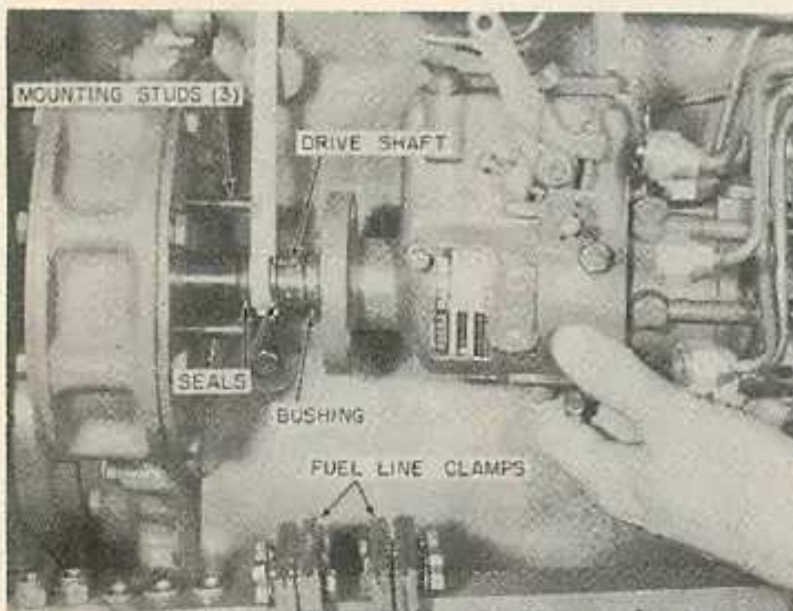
Remove fuel line clamps and spread fuel lines as shown to remove pump. Use Roosa-Master seal compressor tool 13371 as shown to aid in reinstalling pump over drive shaft seals.
